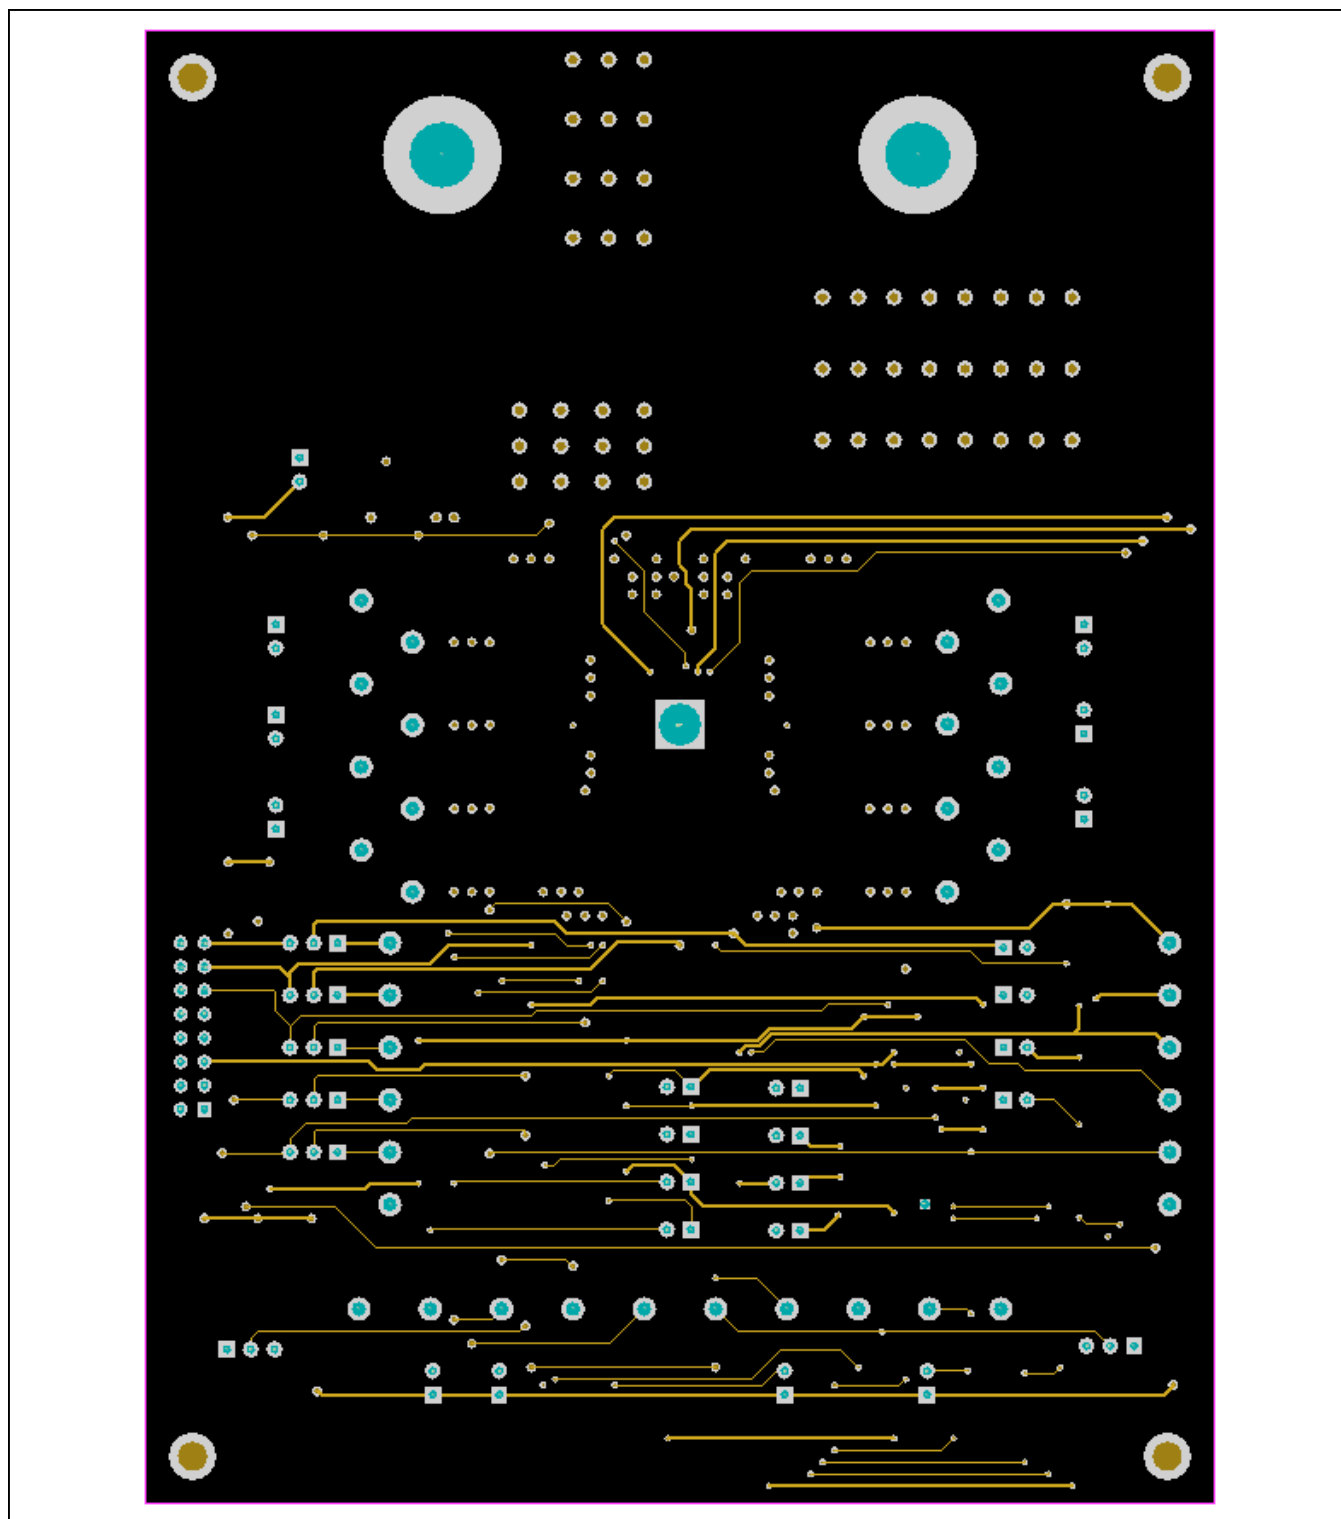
MAX14900E EV Kit PCB Layout—Mid-Layer 1
